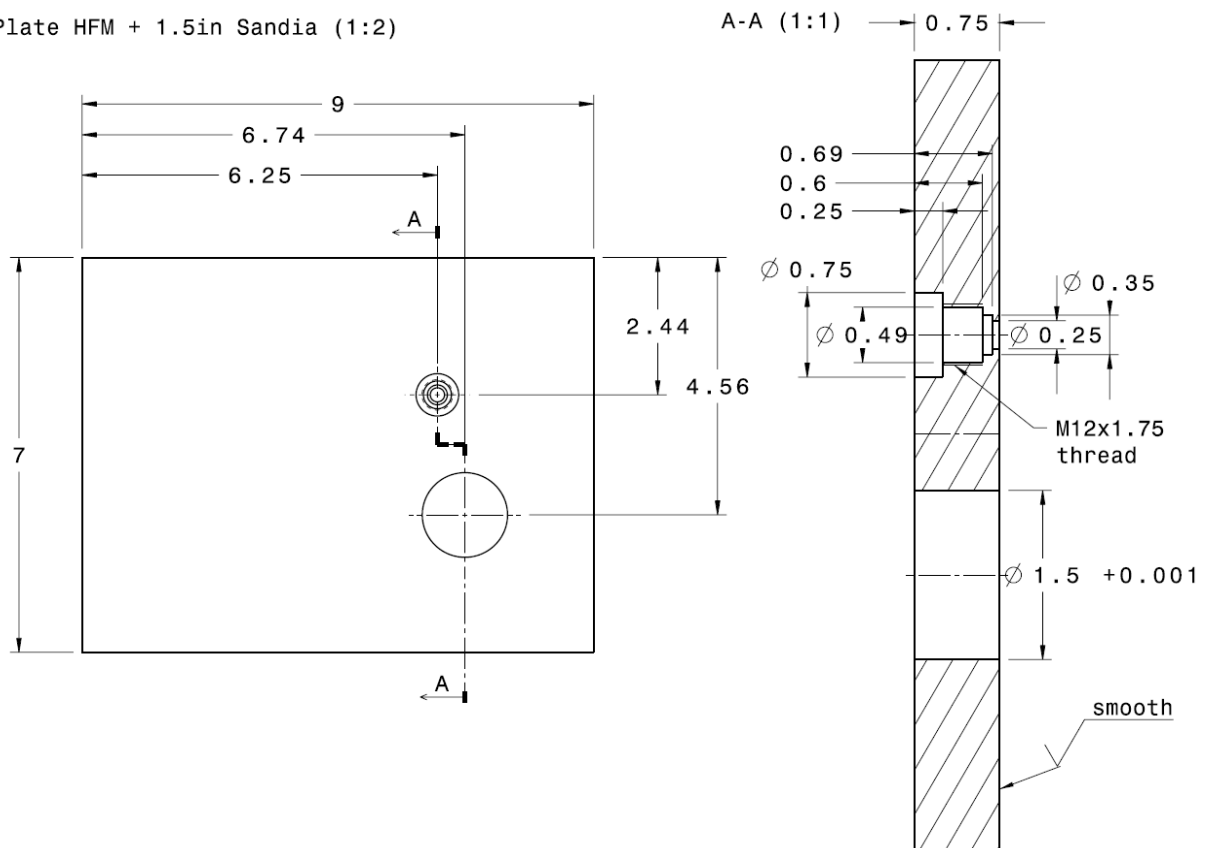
6: Shear stand plate for HFM and 1.5 in. SB gage.
